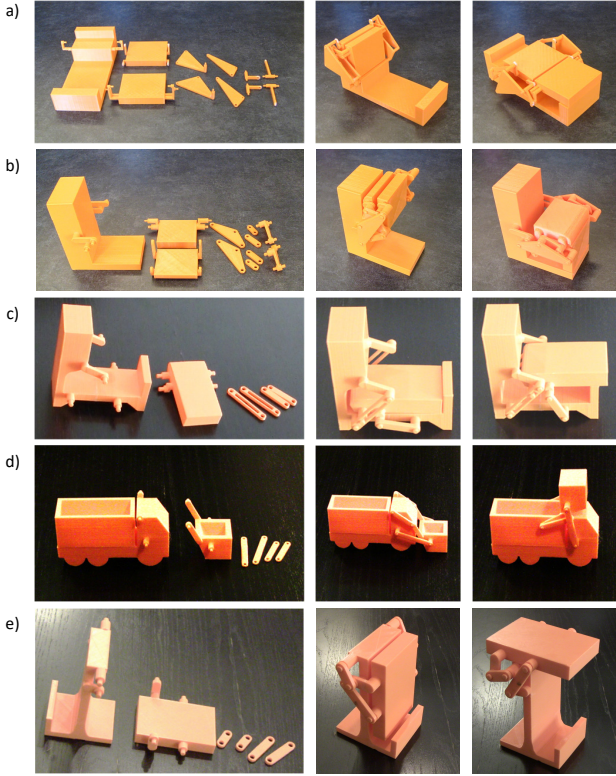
3D printed examples. The output 3D geometry of a) wall bed, b) wall chair, c) sofa bed, d) garbage truck, and e) folding table were printed with a desktop 3D printer. The printed parts can be assembled readily without additional bolts and nuts.
